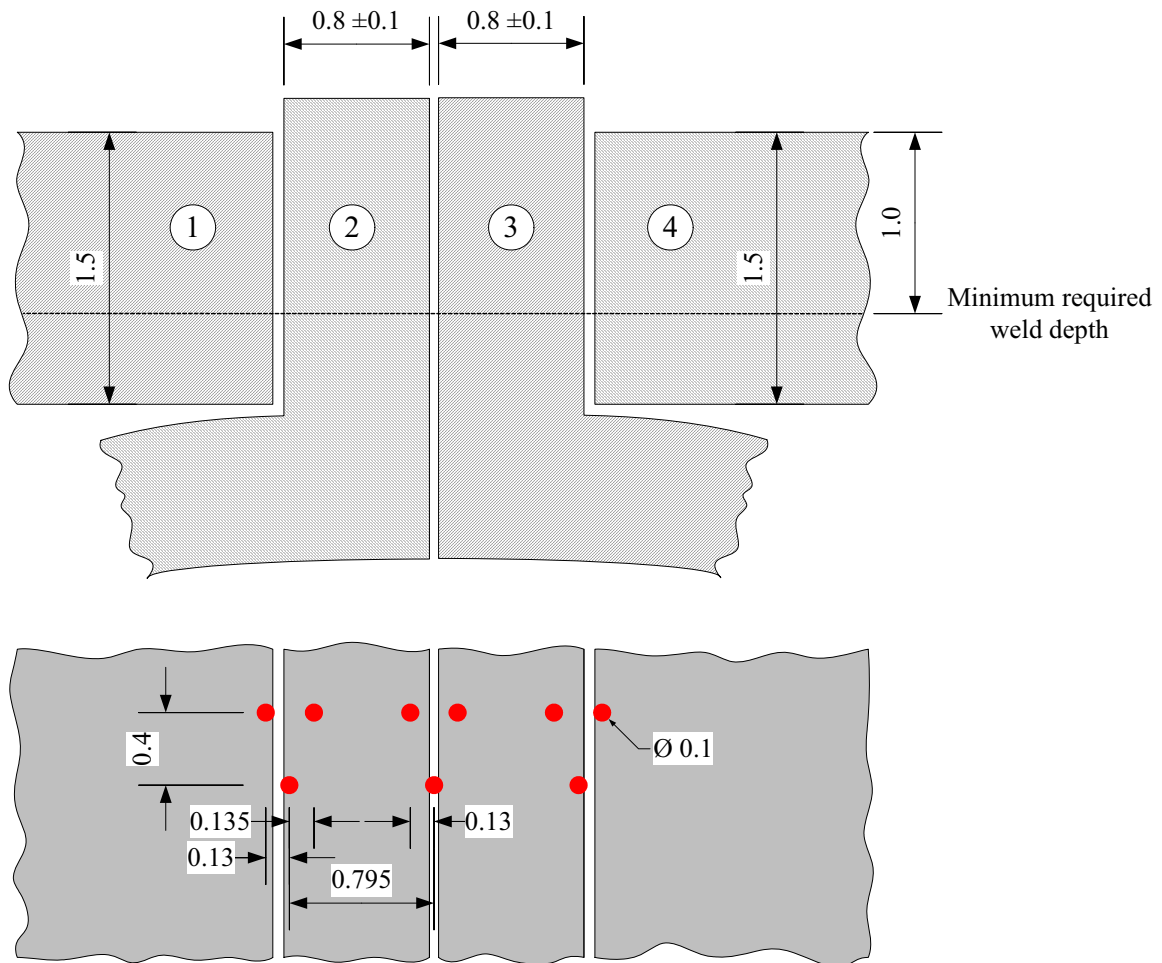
Cross section at the top of the figure: Shows counter clock wise rotation of magnification in Fig. 1. The geometry to weld, where a minimum of 1 mm penetration is required in each joint. The two sheets in the middle, sheets 2 and 3, have thickness tolerances, whereas the thicknesses of the groove gap between sheets 1 and 2 and sheets 3 and 4 are unknown. Spot pattern with red dots at the bottom of the figure: Top view of the above cross section. The proposed spot pattern design with dimensions is shown on the four sheets. The pattern is symmetric over a horizontal line in the center, and the position is presented according to the above geometry to weld. All measurements are in mm.
